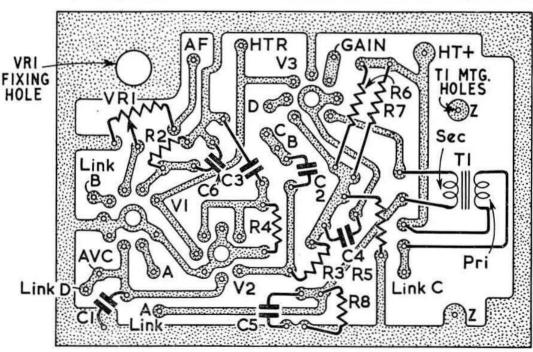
Layout of the printed circuit board showing the position of fixing points for the components. This diagram is life-size and may be traced on to the board as described in the text.
